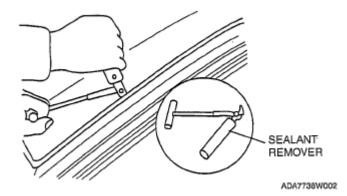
Cutting Glass Sealant Courtesy of MAZDA MOTORS CORP.
